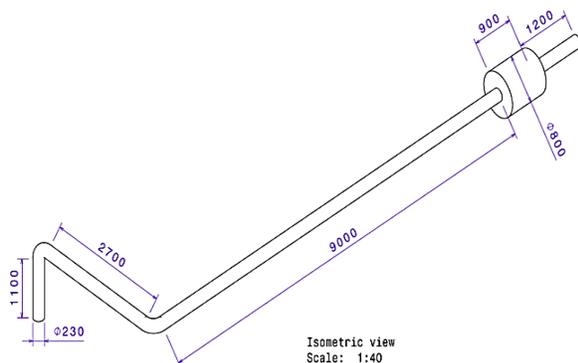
New design of the exhaust piping for diesel generator engine using CAD software.
